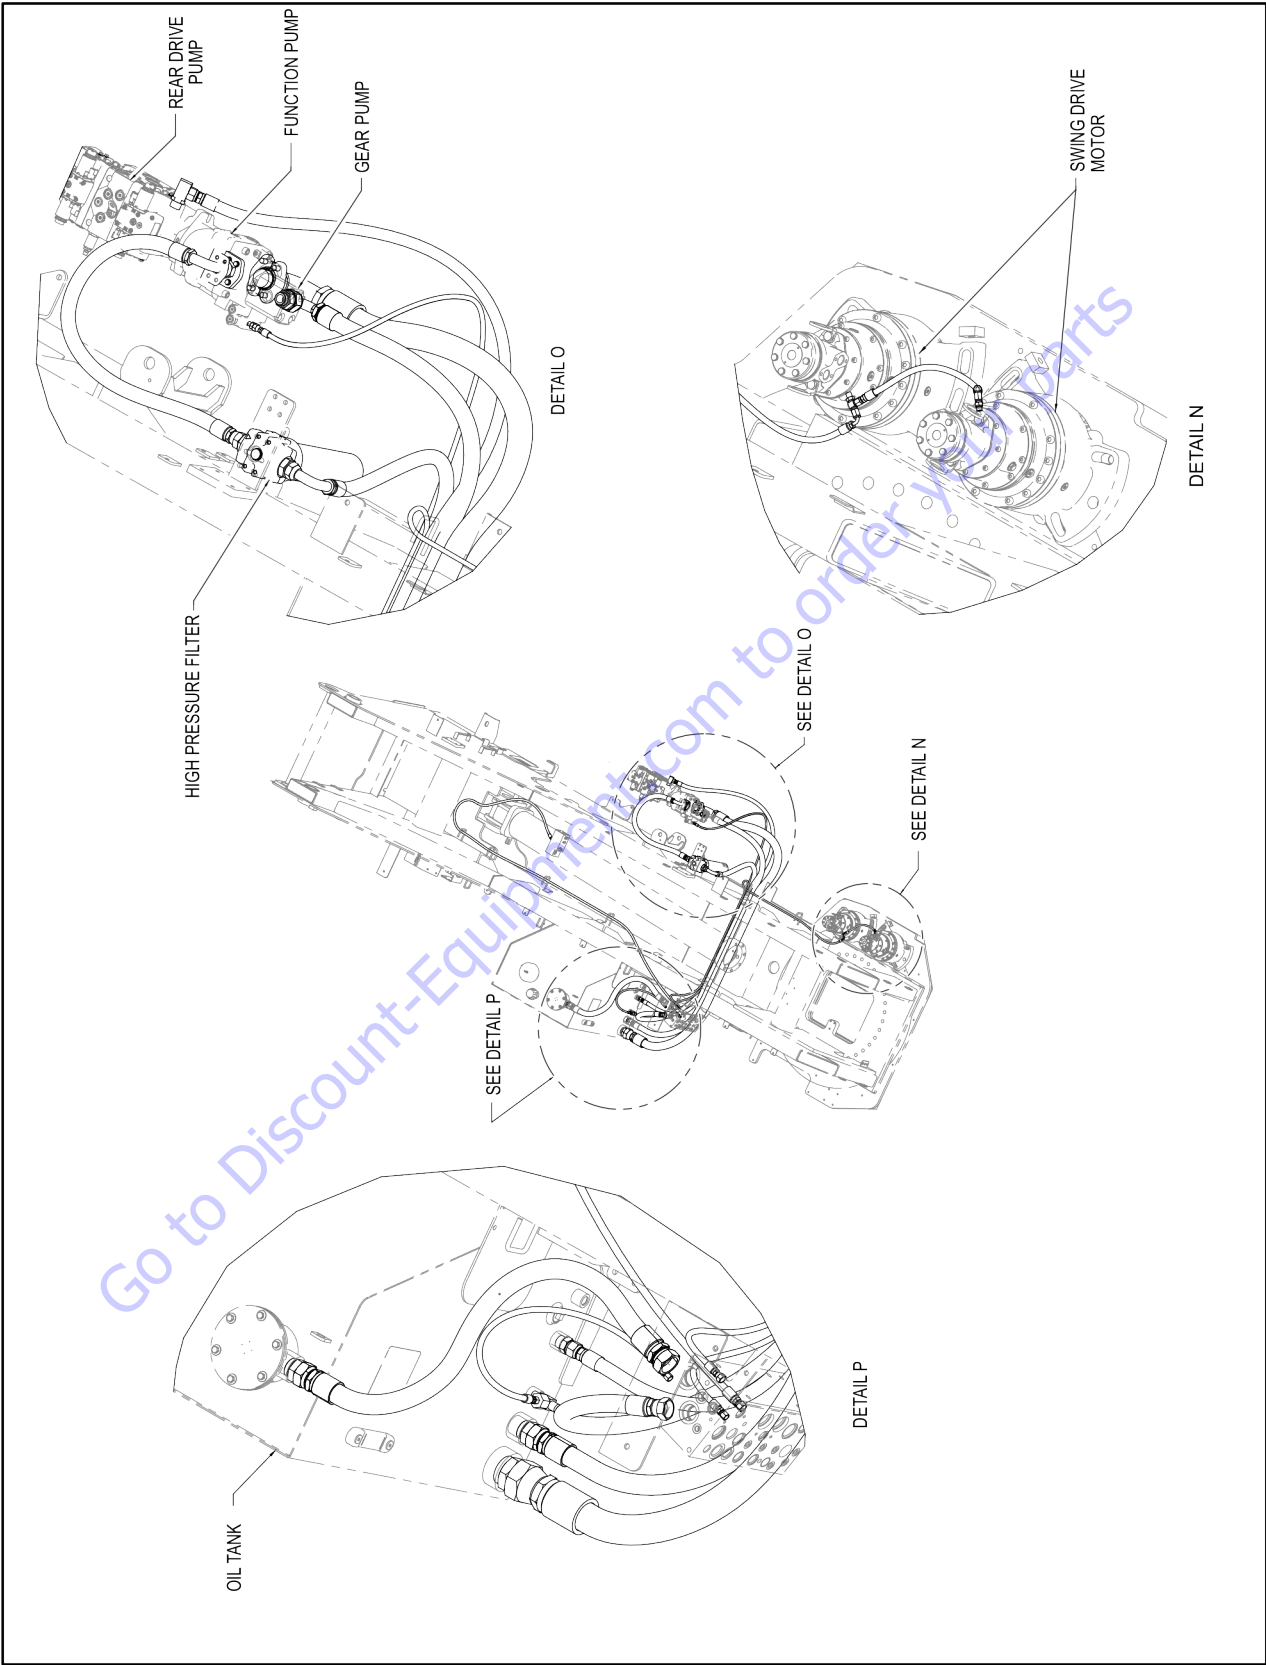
Hydraulic Hose Installation - Sheet 3 of 8
